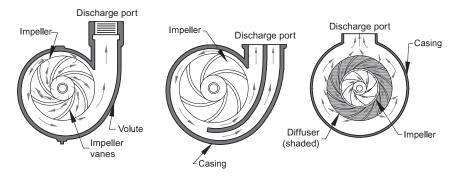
Three types of casings: (Left) single-volute; (middle) double-volute; (right) diffuser.
